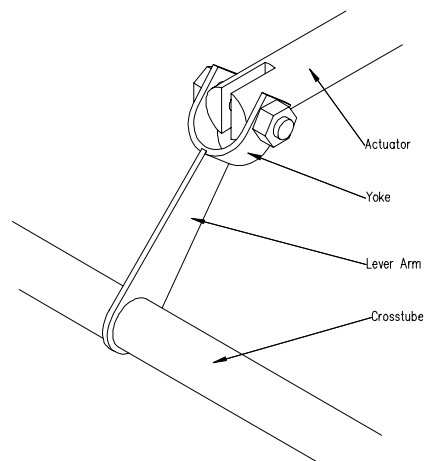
Mounting the actuator clevis with a yoke attachment
